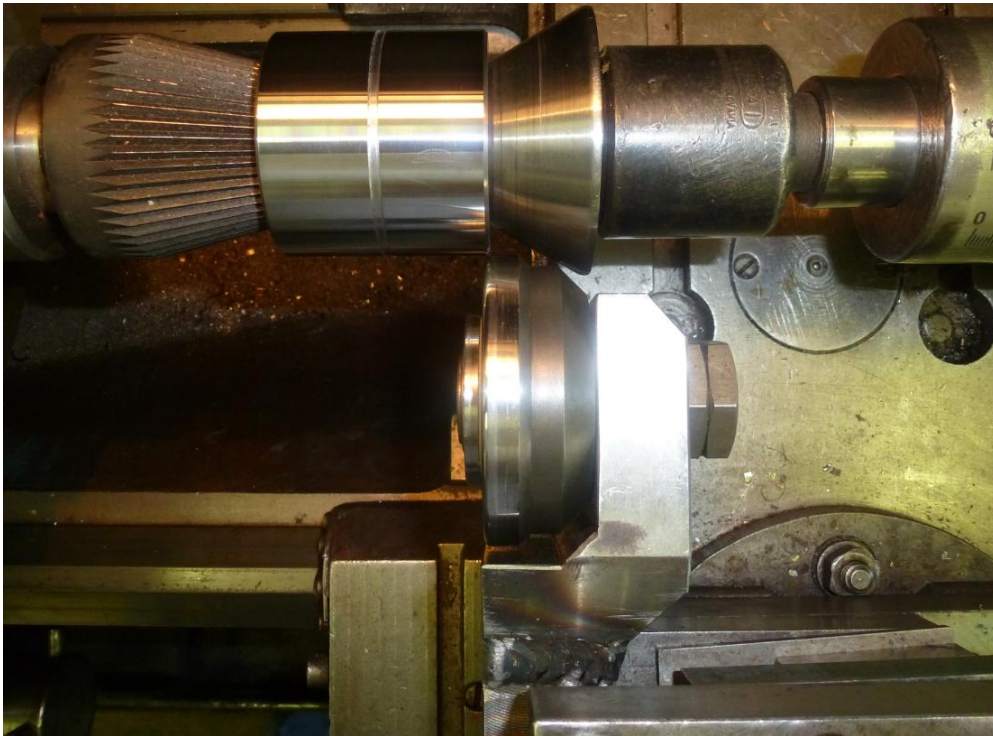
Burnishing tool with rotating hardened pulley and the sample "PUZDRO"
